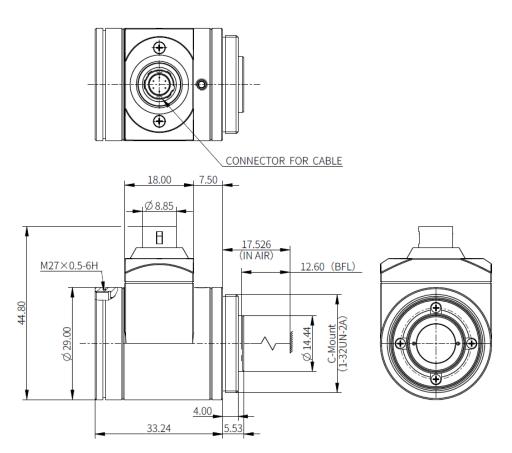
Mechanical drawing of the ELM-8-4.0-9-C
